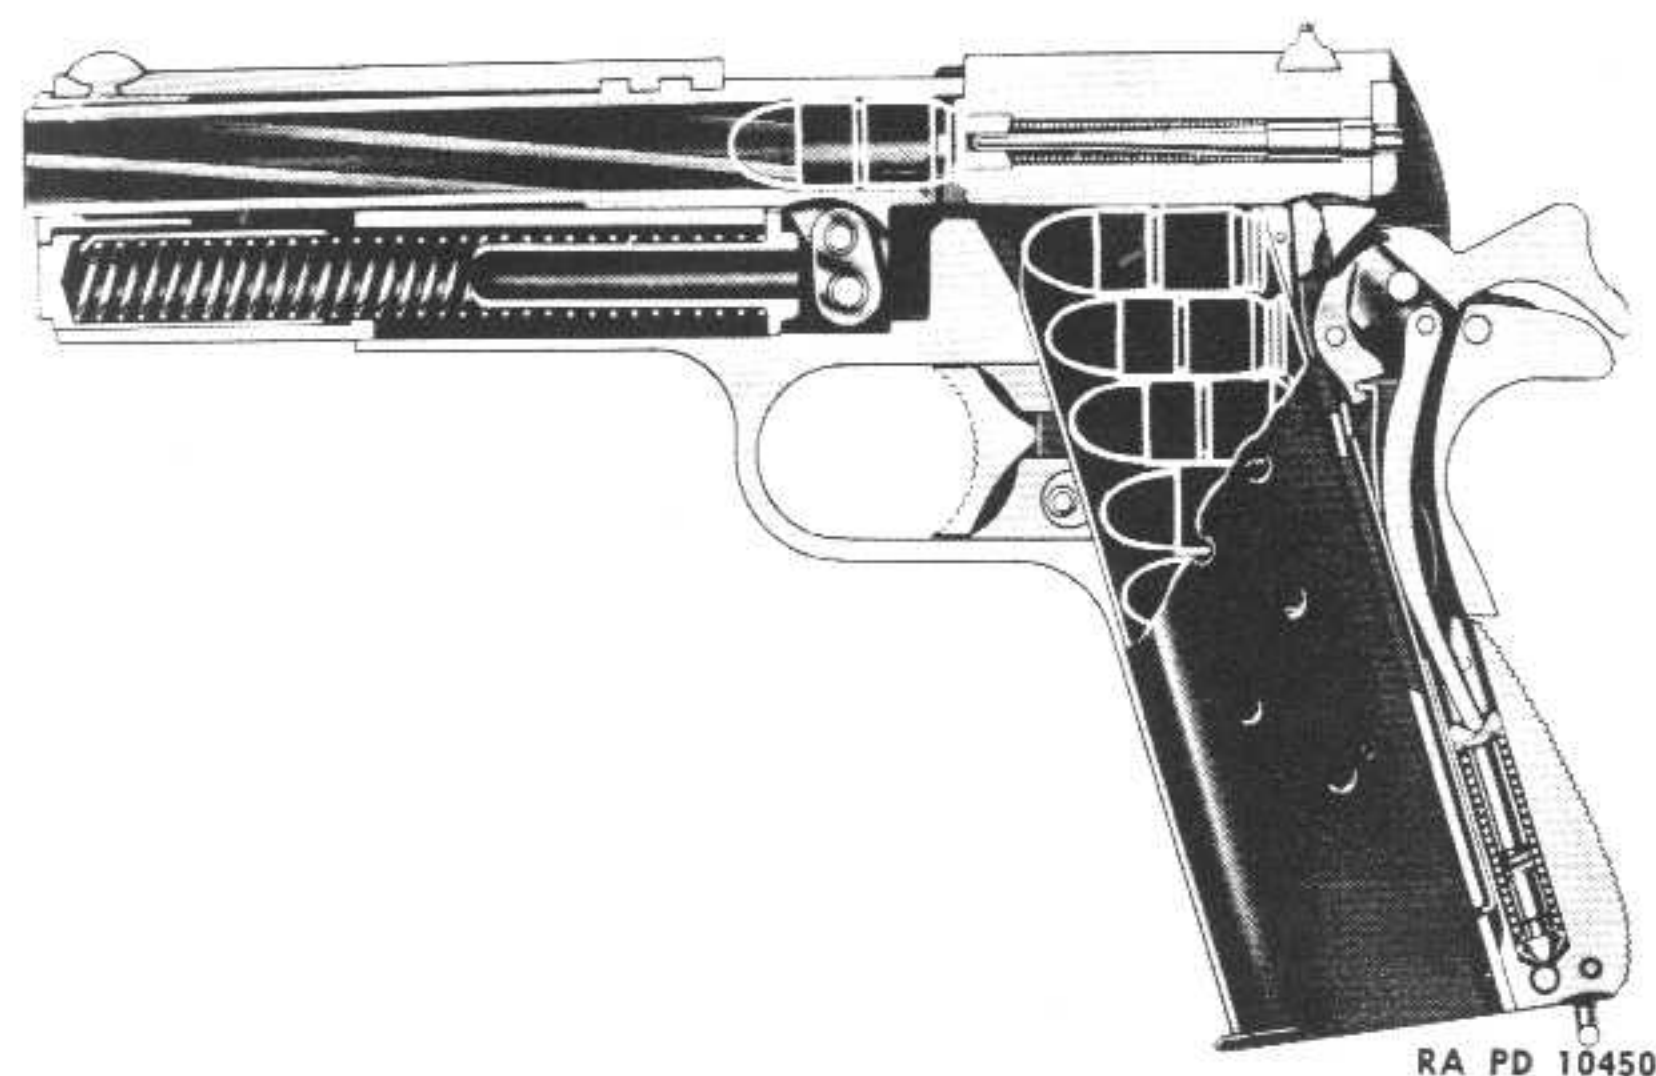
Sectional View of Pistol M1911A1, Slide Closed, Cartridge in Chamber, Hammer Back
